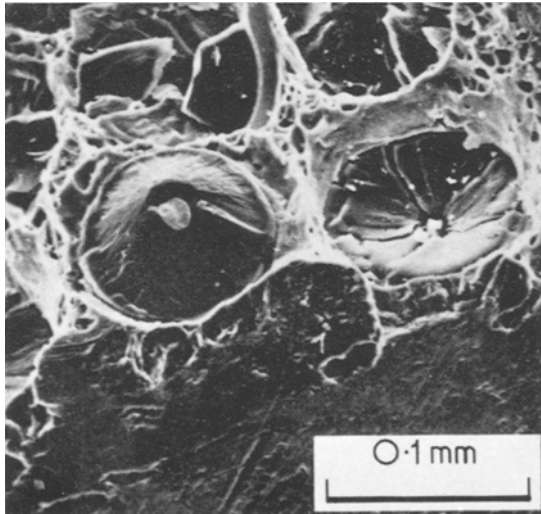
Fatigue specimen failure, showing tensile failure and matrix fatigue cracks.
